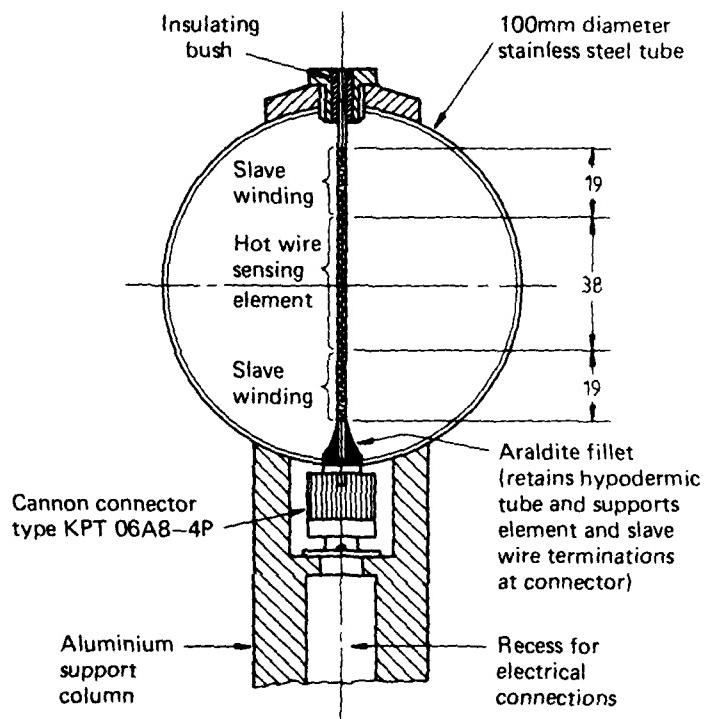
SCHEMATIC LAYOUT OF THE MEASURING HEAD
